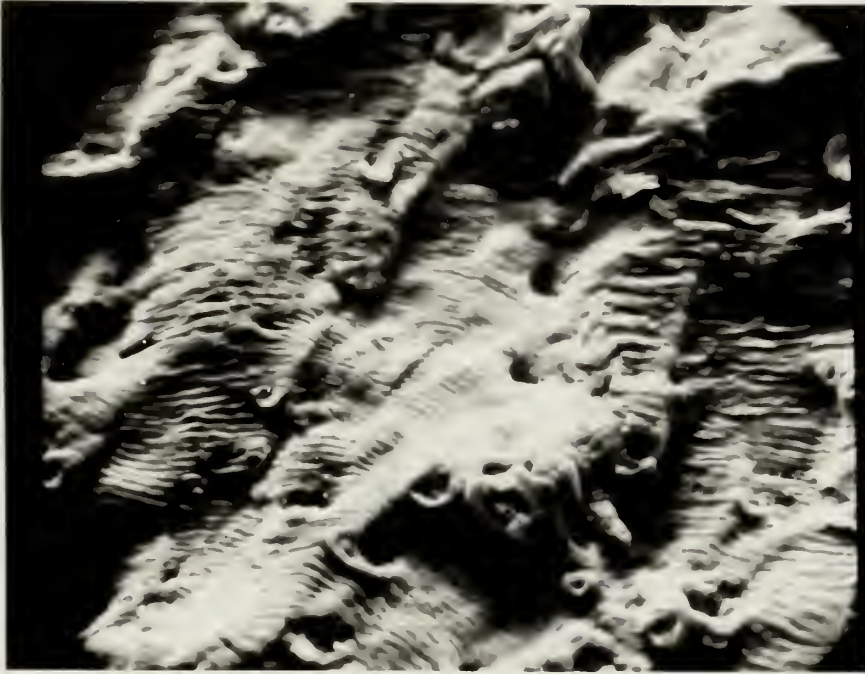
Inconel 625 weld metal fatigue fracture surface. 2680X.
